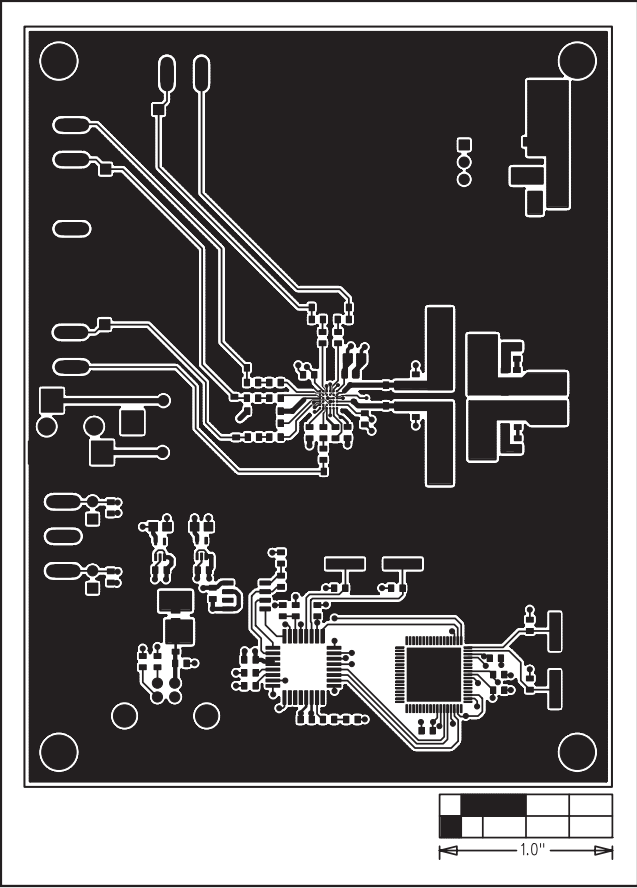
MAX9796 EV Kit PCB Layout—Component Side
